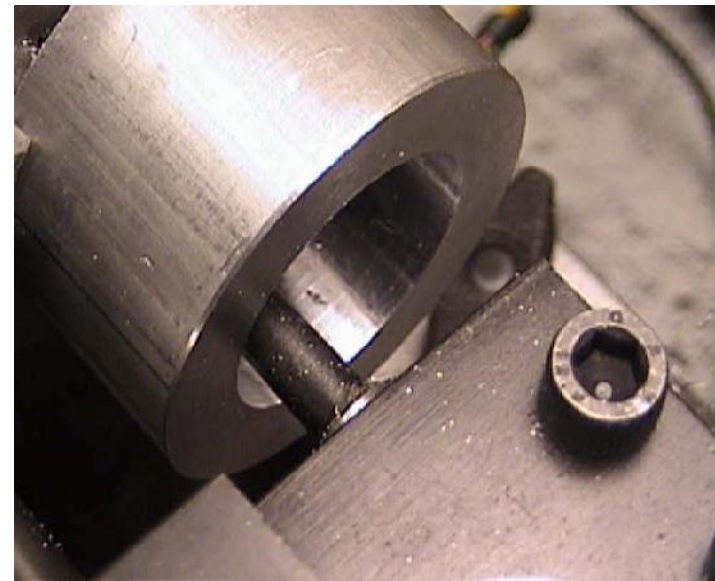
Tool used to bore small diameters requires more front clearance to prevent rubbing.
